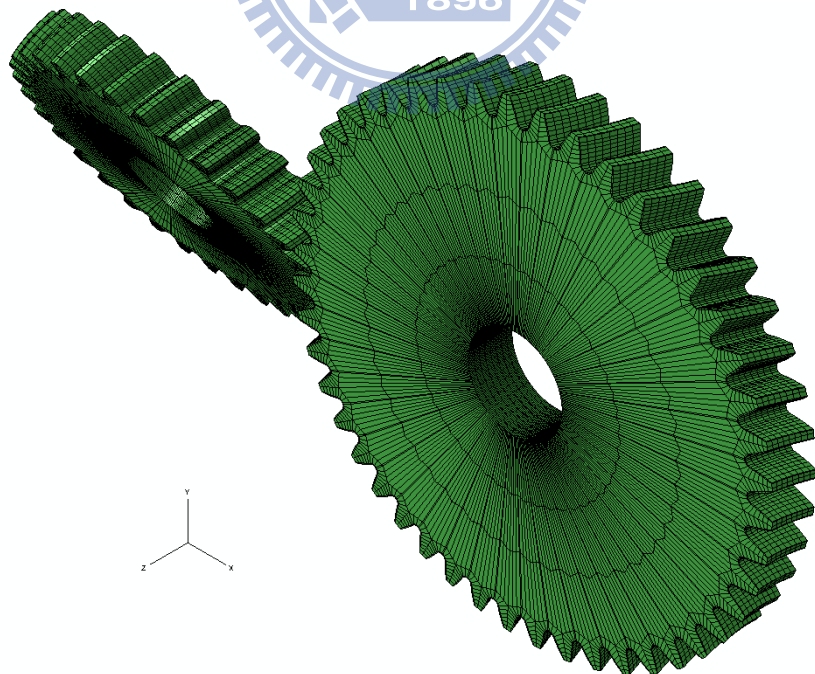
Finite element contact model of a spherical helical gear set with convex pinion and concave gear under crossed axes mounting mode
